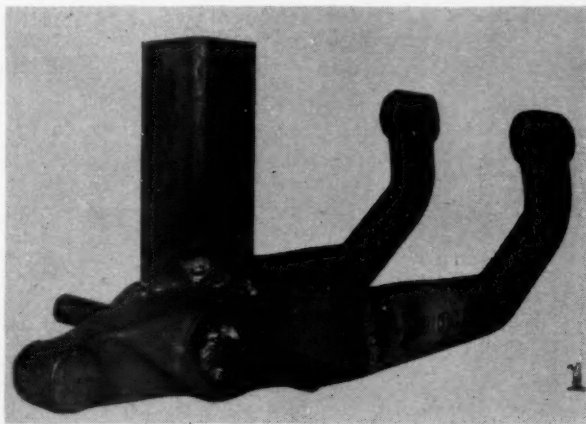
AN EXAMPLE OF WELDED CONSTRUCTION INVOLVING THE WELDING OF CAST STEEL TO CAST STEEL, CAST STEEL TO STRUCTURAL STEEL AND CAST STEEL TO COLD-ROLLED STEEL. CAST STEEL WAS WELDED TO CAST STEEL AS NOTED IN THE LOWER MEMBER.
